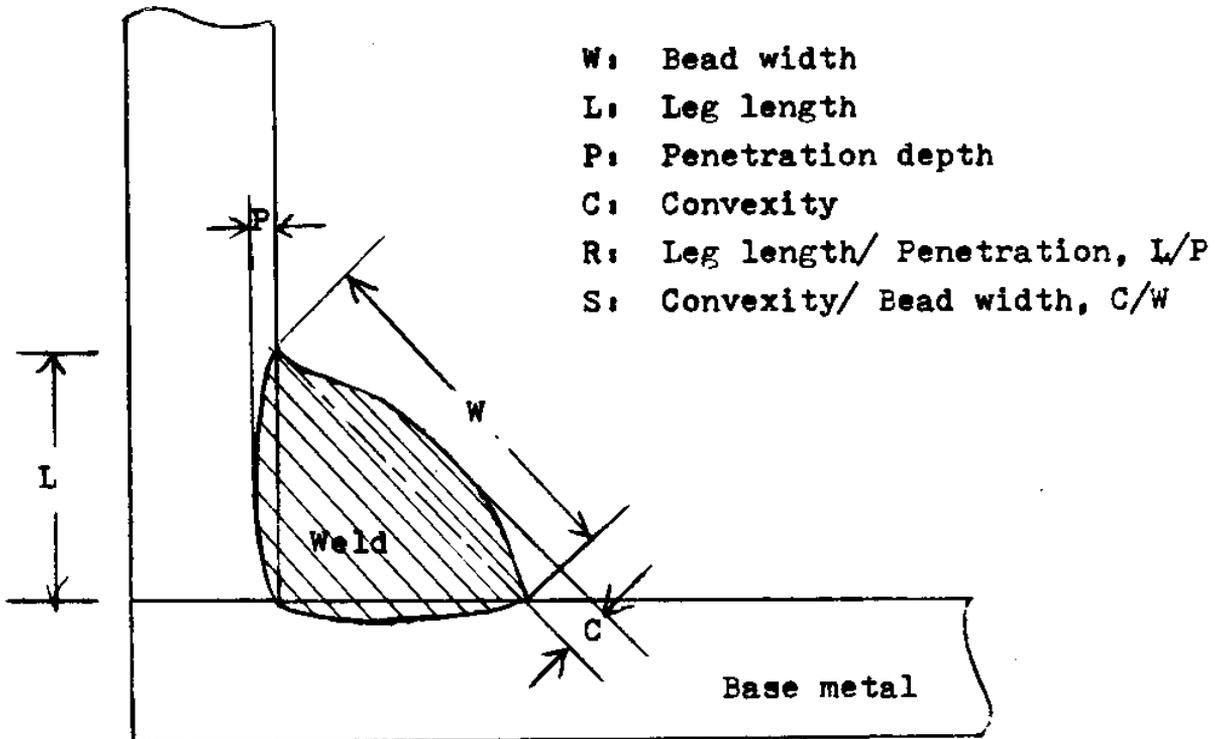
Definitions of symbols for weld shape factors
